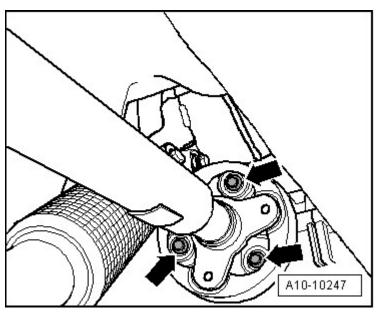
Drive Axle Heat Shield Courtesy of AUDI OF AMERICA, LLC
